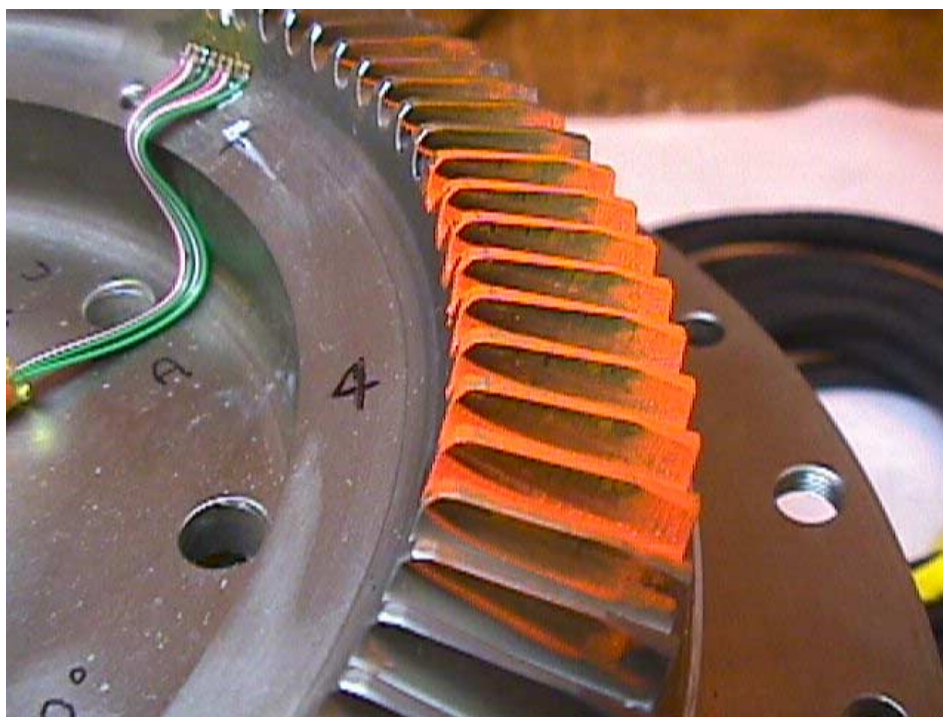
Upper face gear tooth patterns for Idler 4 mesh.
